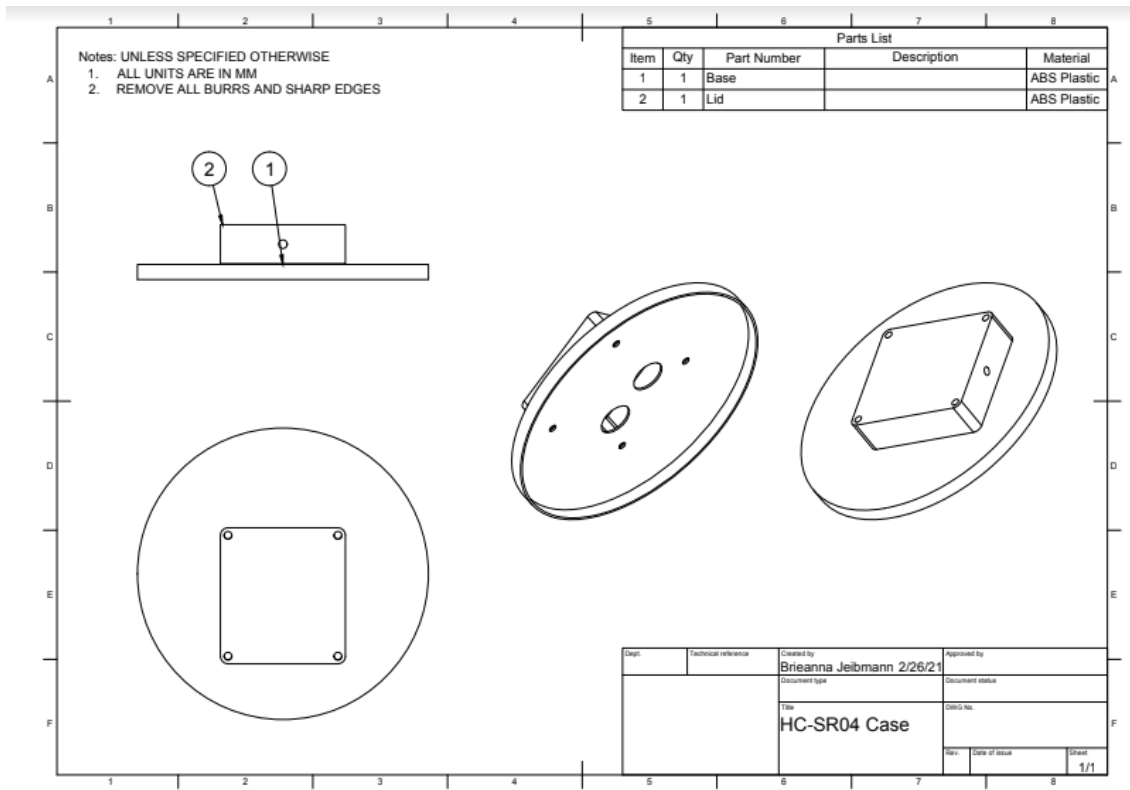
Distance Sensor Enclosure Mechanical Drawing
